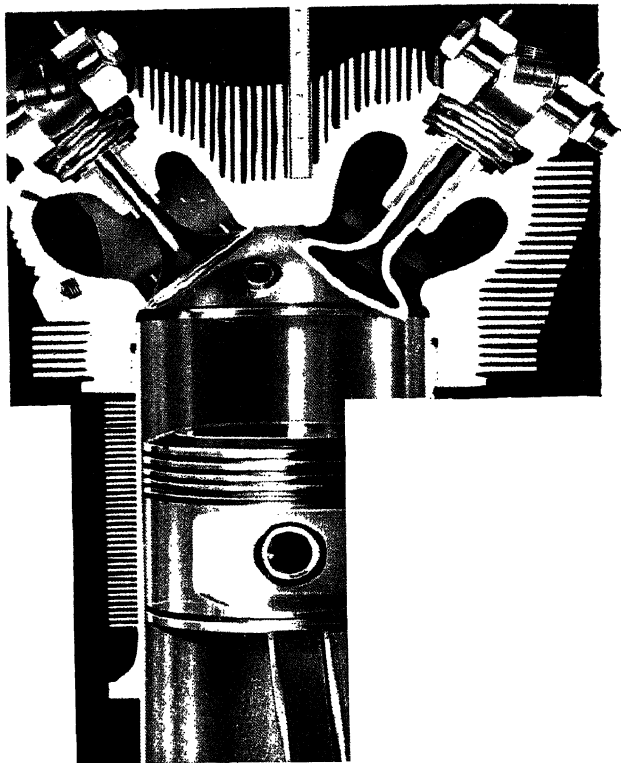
Sectional view of Wright "Cyclone" G-200 cylinder showing cooling fins and valves.
